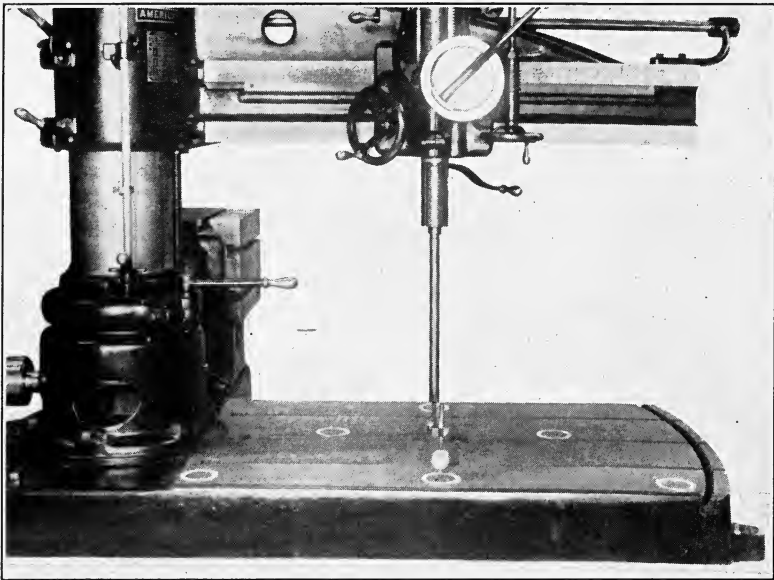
Testing the parallelism of a radial drilling machine arm and base and the squareness of the spindle with the base.
